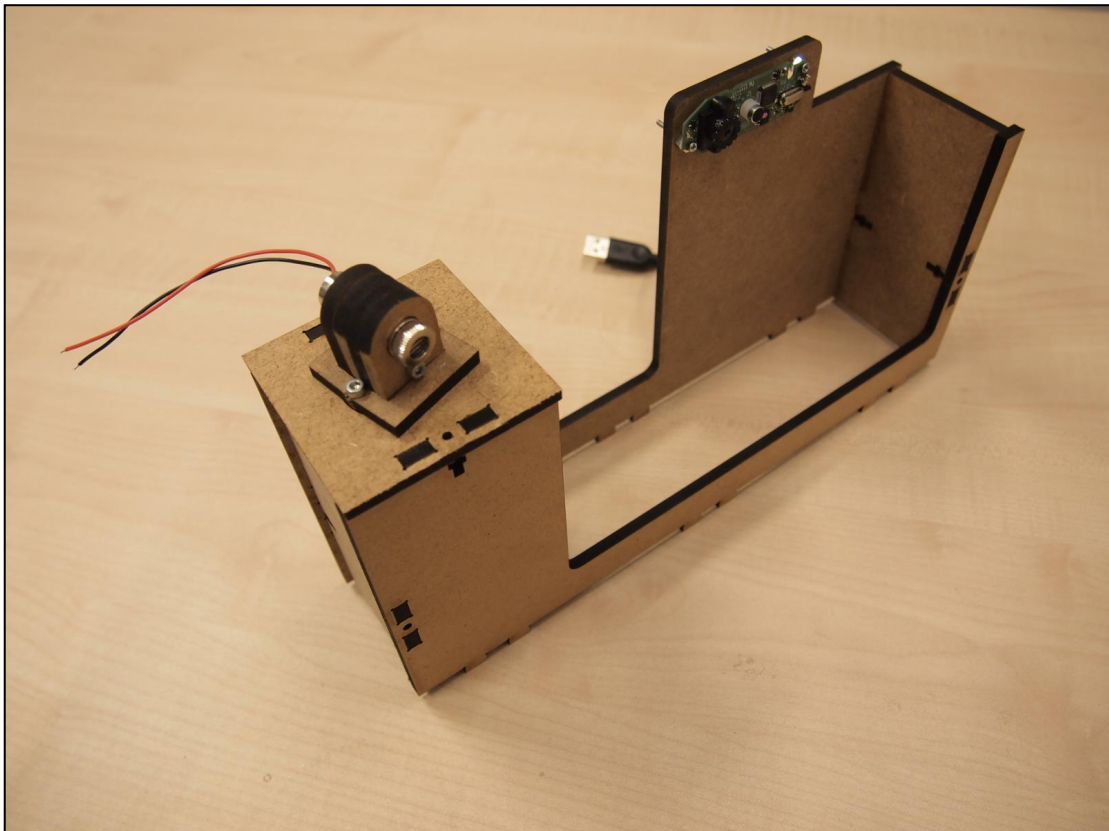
and assemble them as shown. Use six DIN 912 M3x16 screws and nuts to secure the bracket. You're done with the camera / laser bracket.
